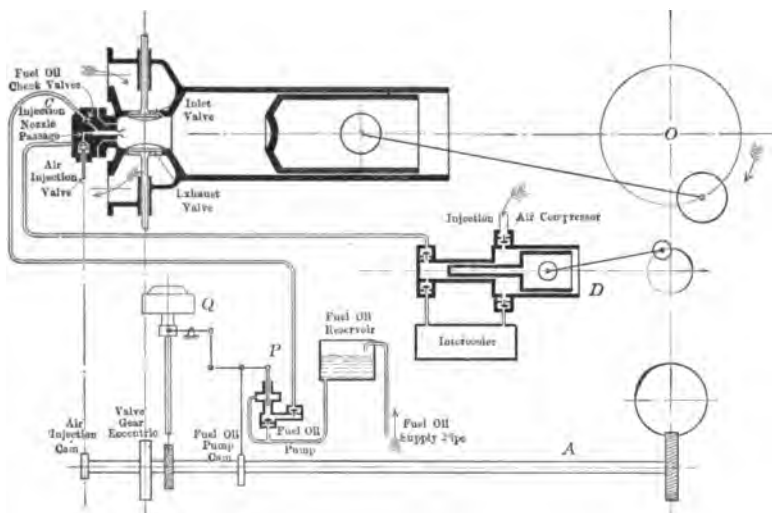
Schematic arrangement of Diesel engine mechanism.
